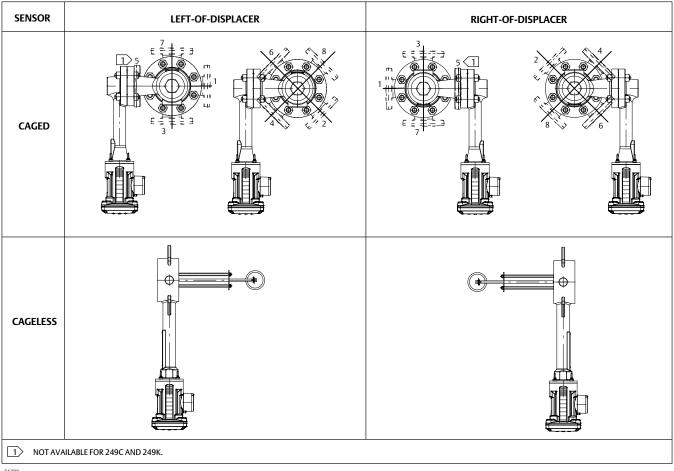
Typical Mounting Positions for Digital Level Controller on Fisher 249 Sensor
